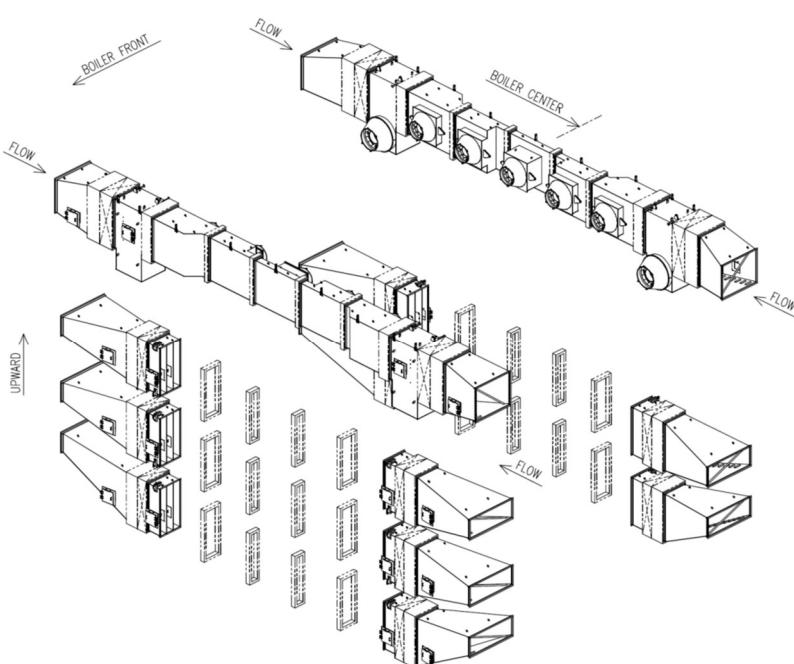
(c) Specific drawing of Over Air Ports and Side Air Ports
